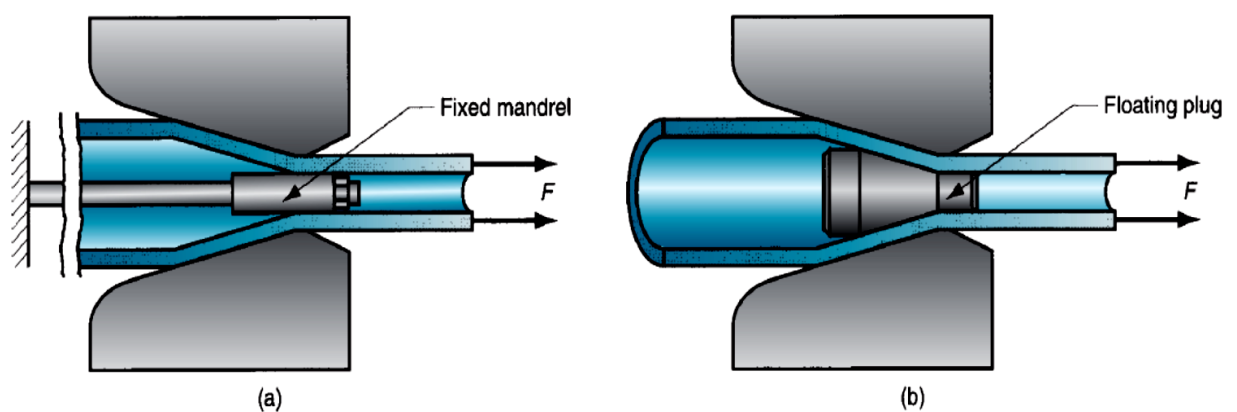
tube drawing with mandrel: (a) fixed mandrel (b) floating plug
